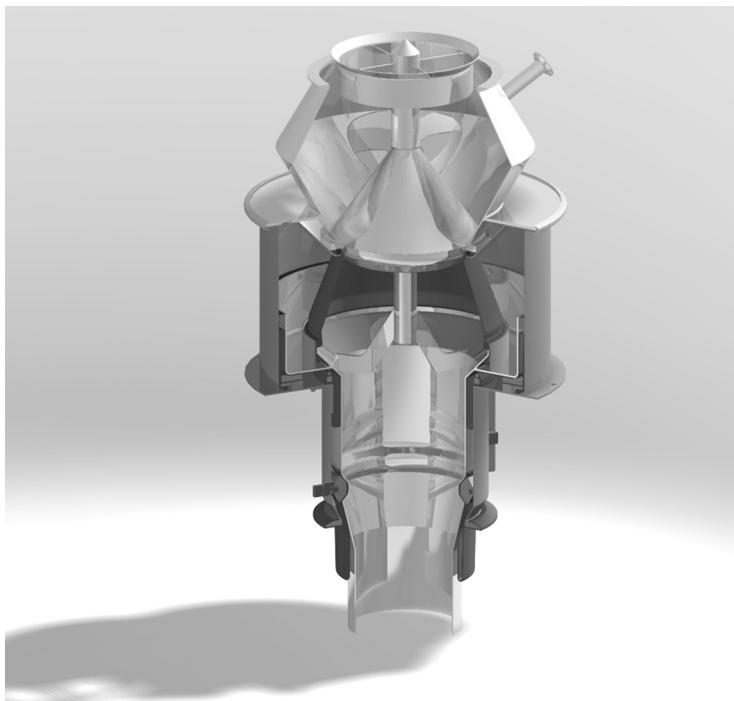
Cone valve (ISL Cone Valve Technology).
